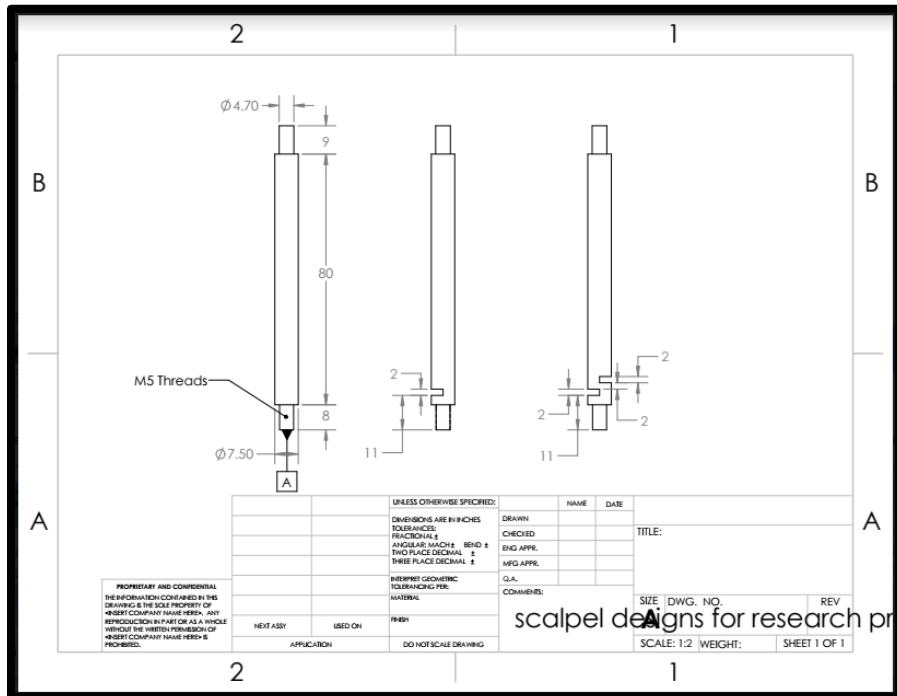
3D Model of the three different scalpel handles to be manufactured. Left to Right: No compliant geometry, single slit geometry, double slit geometry. The units are in mm.
